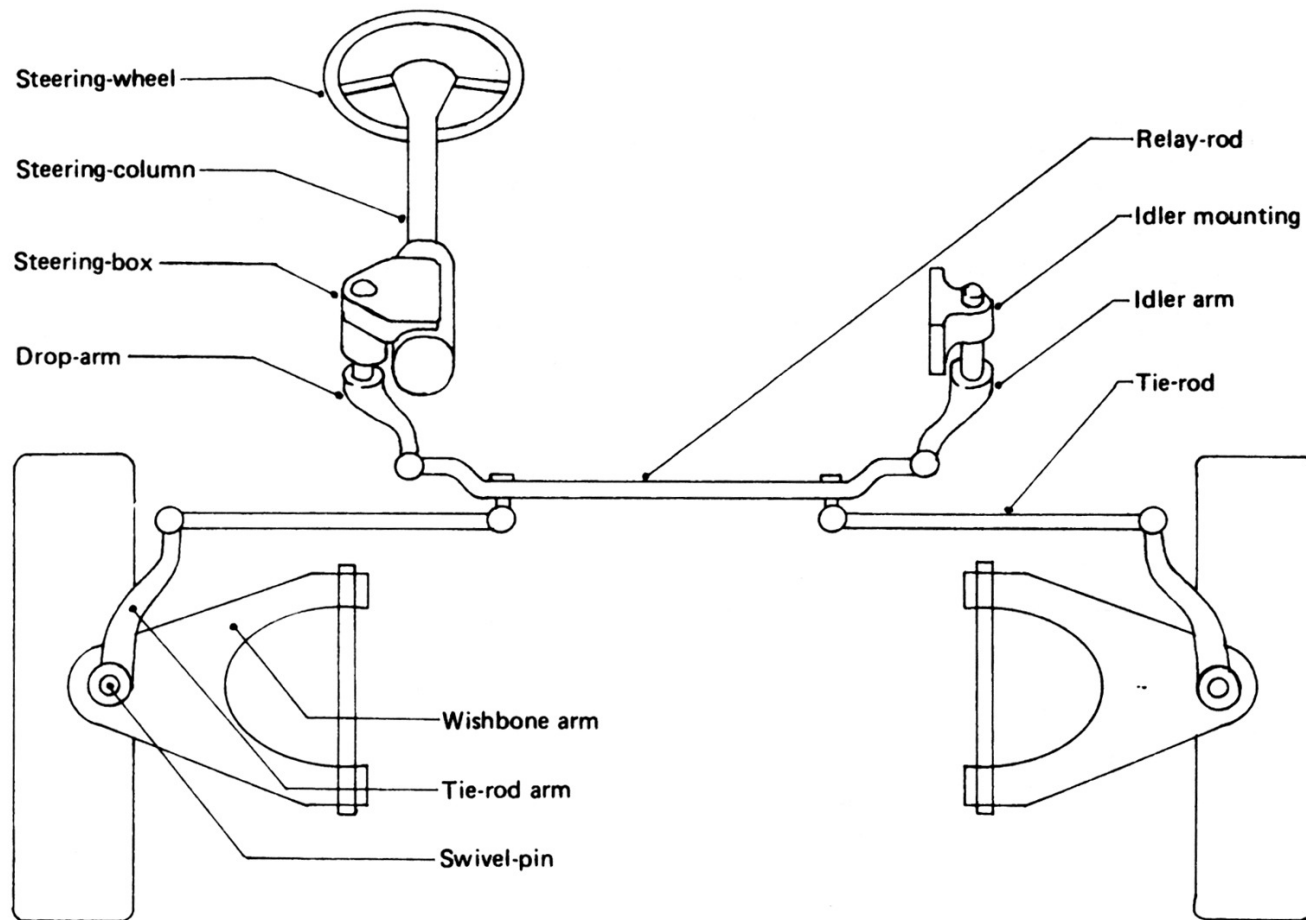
Split track-rod with relay-rod and idler steering-linkage layout
